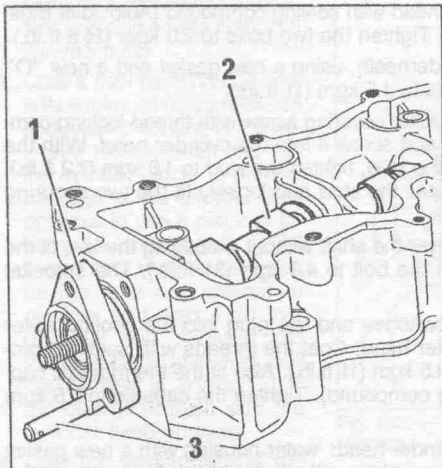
Fitting the camshaft of the DK5 engine. Provisionally fit the camshaft plate (1) and insert the locating rod (3). This will position the camshaft (2).
